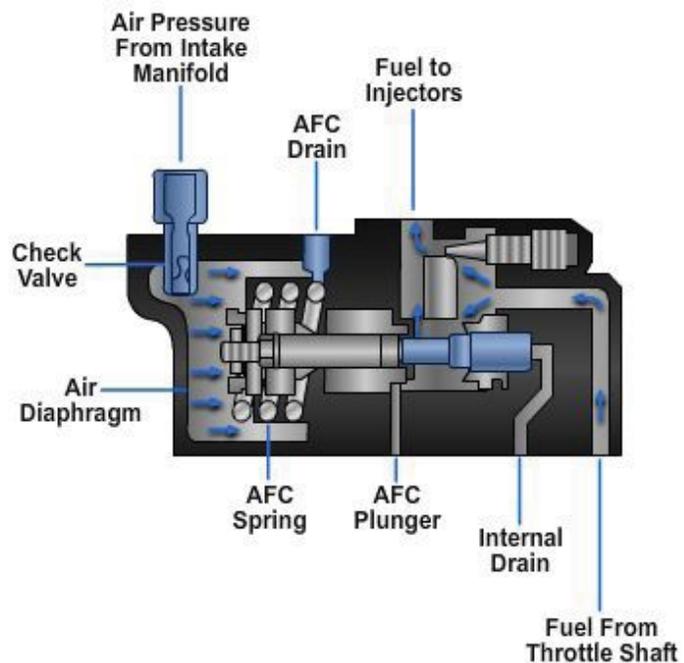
Cutaway showing components and fuel flow through the air-fuel control (AFC) assembly.
